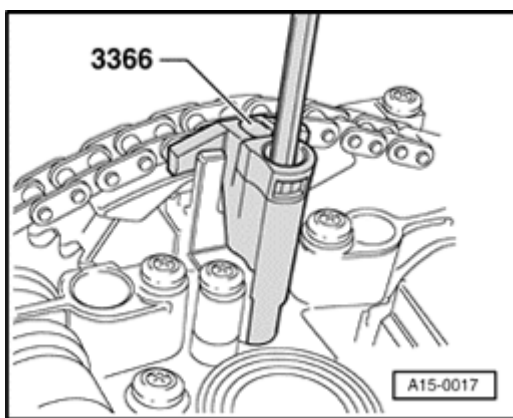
Securing Camshaft Adjuster Or Chain Tensioner Using Bracket For Chain Adjustment 3366
